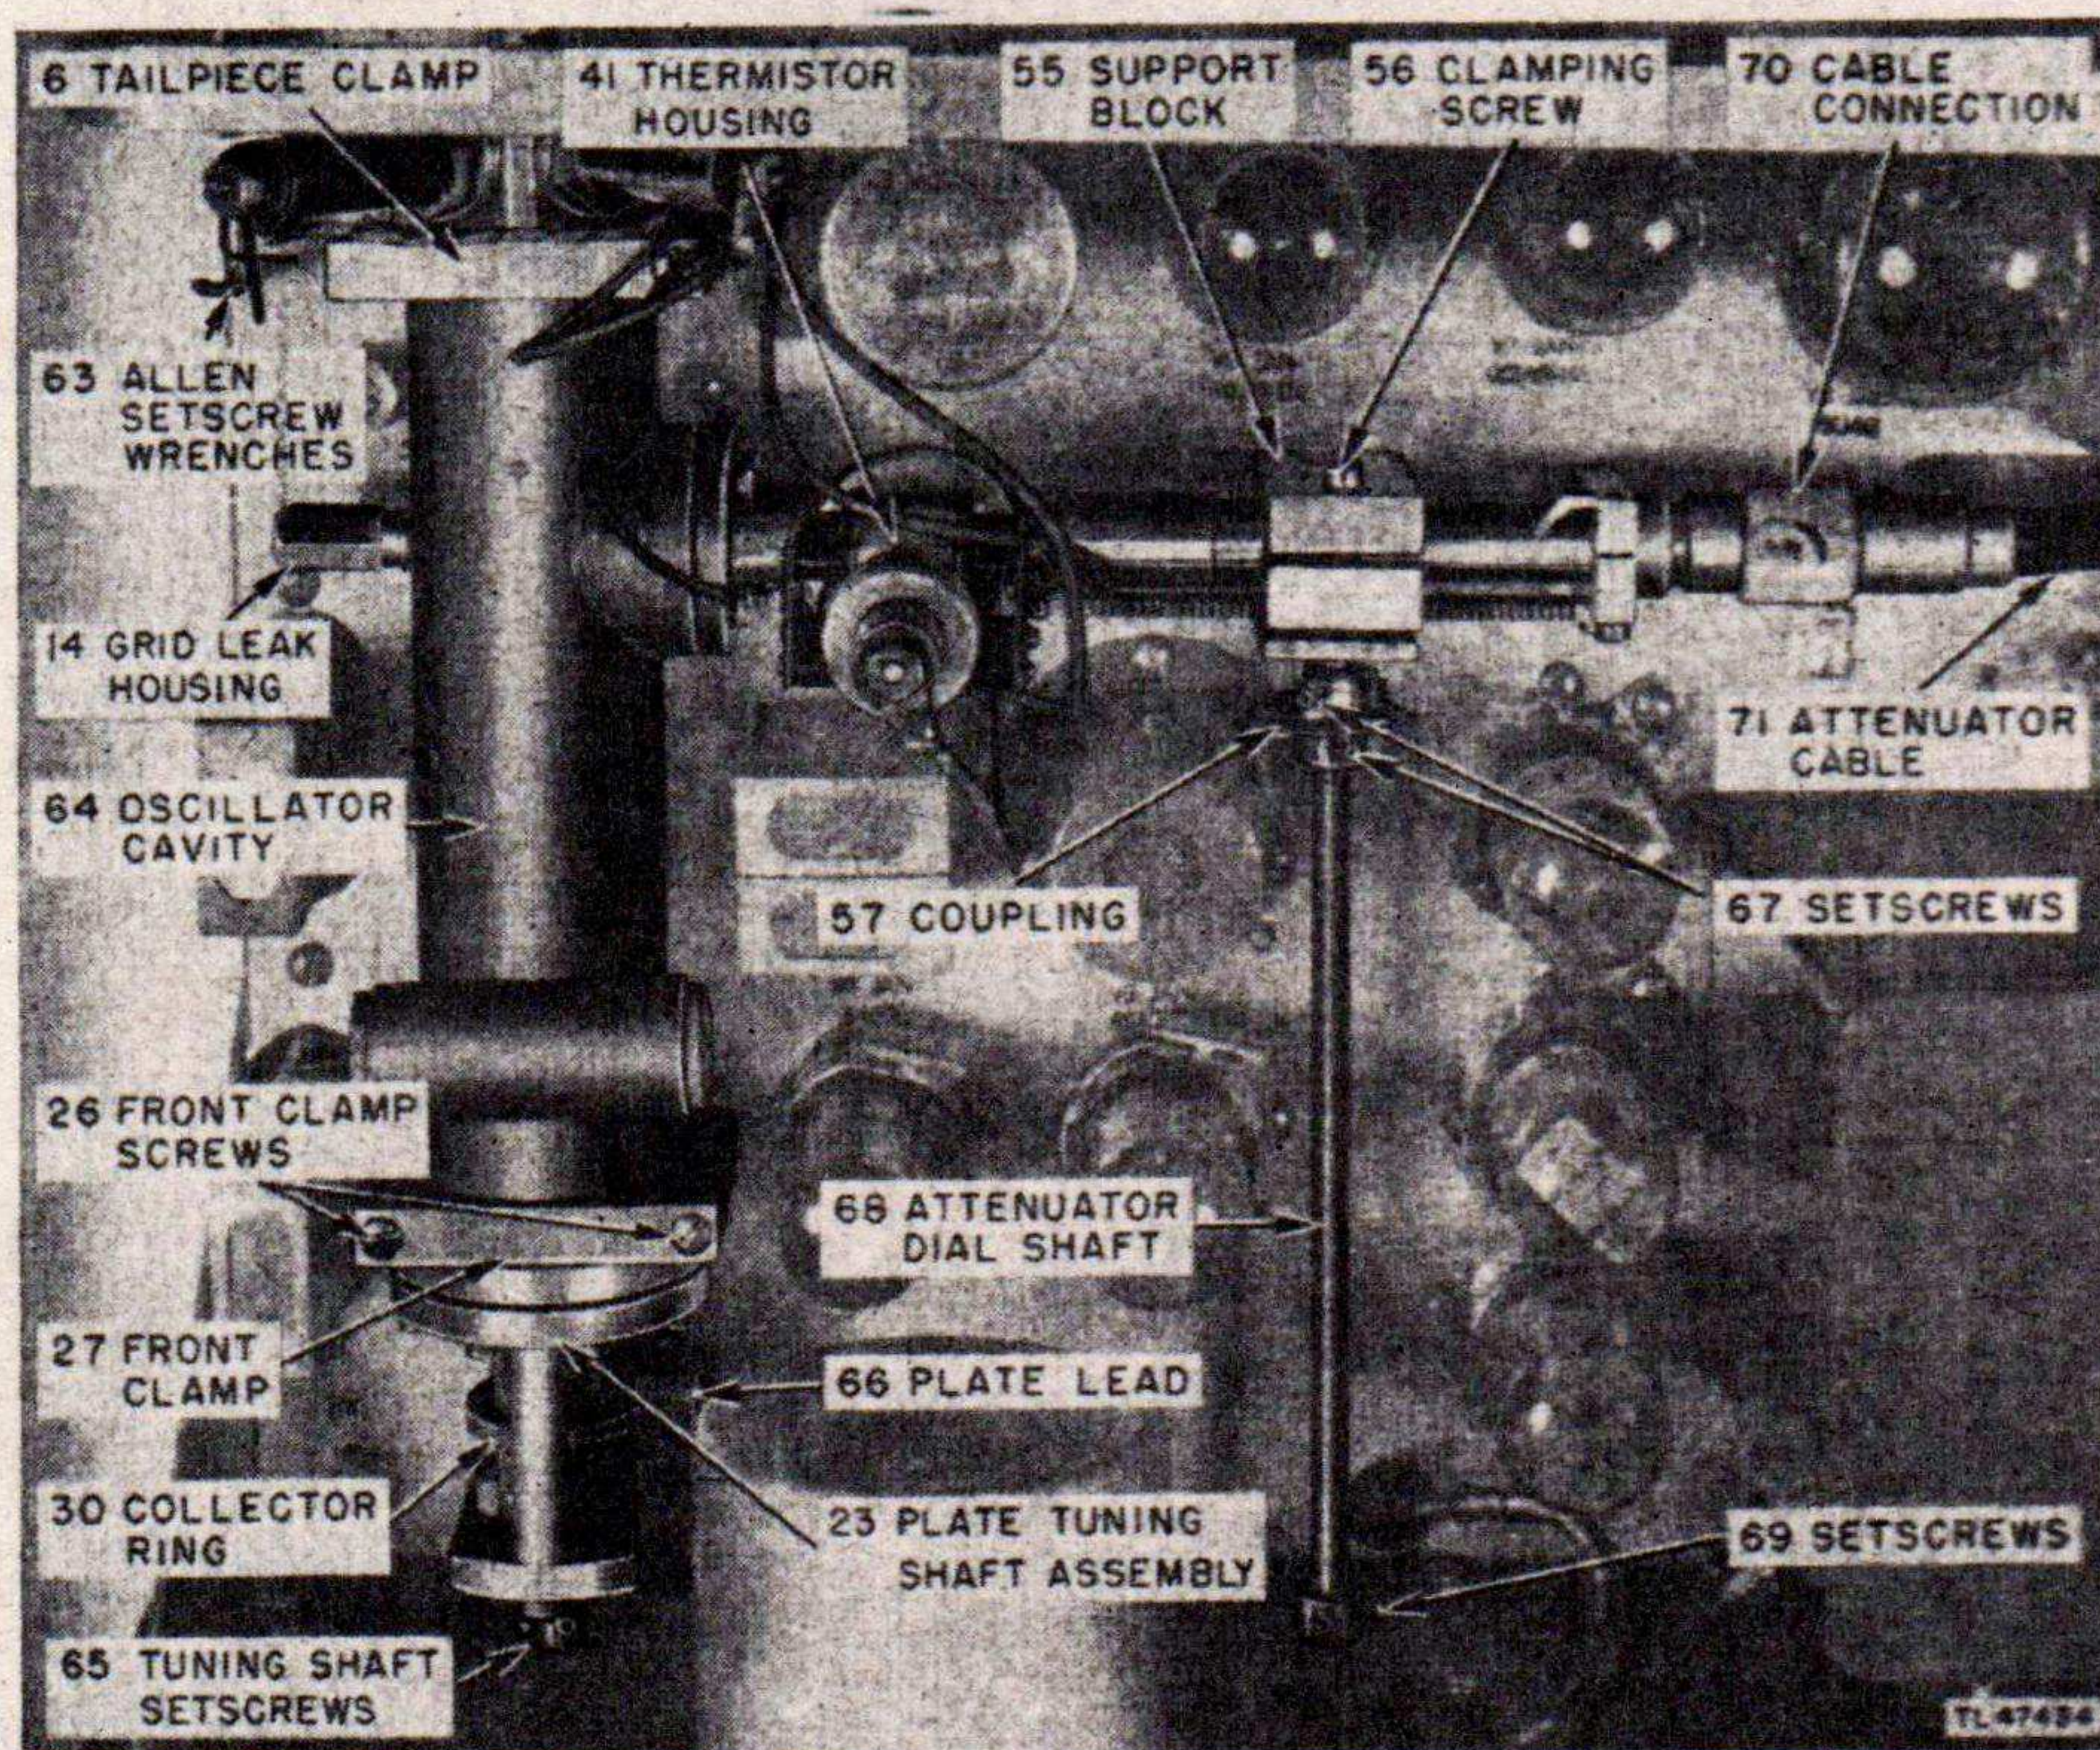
Oscillator assembly mounted on signal generator chassis.
